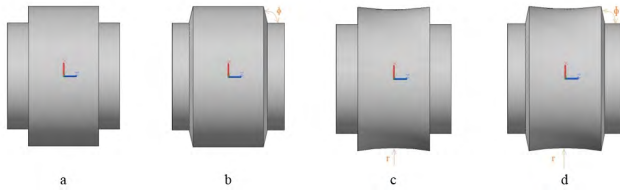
a) initial blank geometry calculated based on constant volume principle in gear rolling (blank #0), b) blank shape modified with inclined surface angle (blank #1), c) blank shape modified with outer surface radius (blank #2), d) blank shapes modified with both inclined surface angle and outer surface radius (blank #3).
